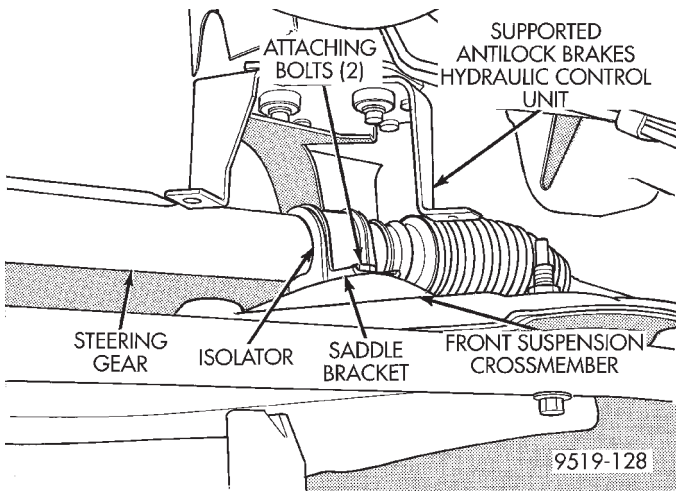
Steering Gear Saddle Bracket Mounting Bolts
